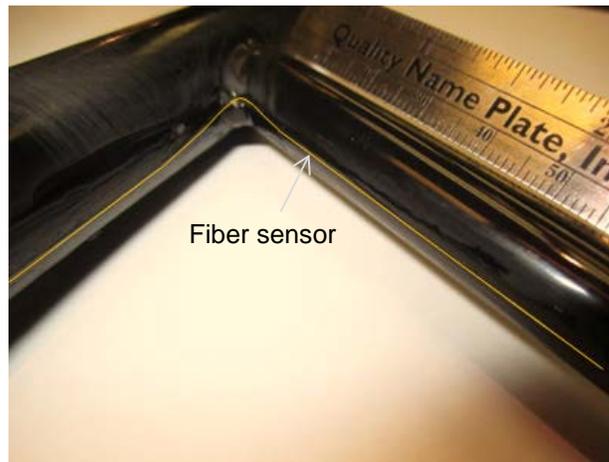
Close-up of acute angle weld instrumented with fiber optic sensor.
